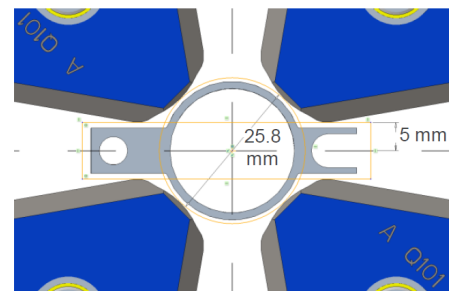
Cross-sectional view of an aluminum chamber within a quadrupole magnet.
